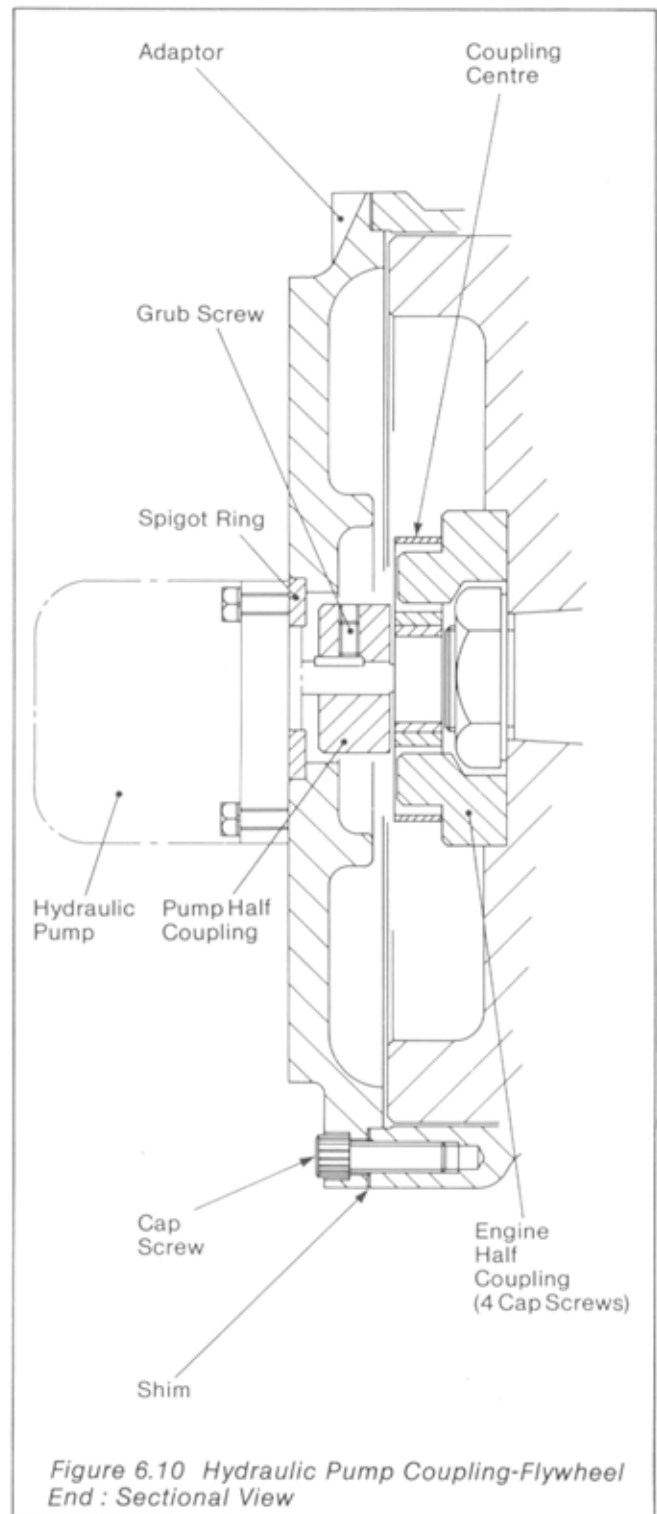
Hydraulic Pump Coupling-Flywheel End : Sectional View
